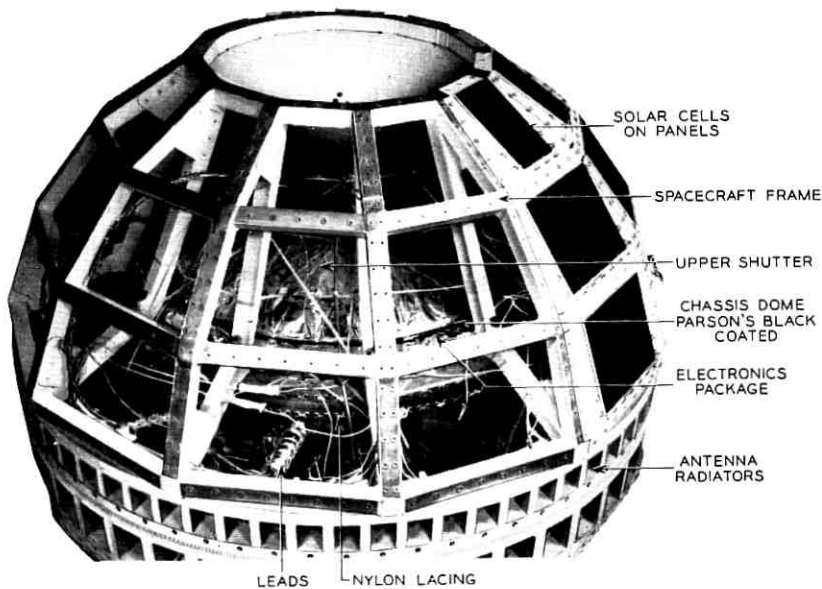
Side view of electronics package in spacecraft, showing upper shutter open.
